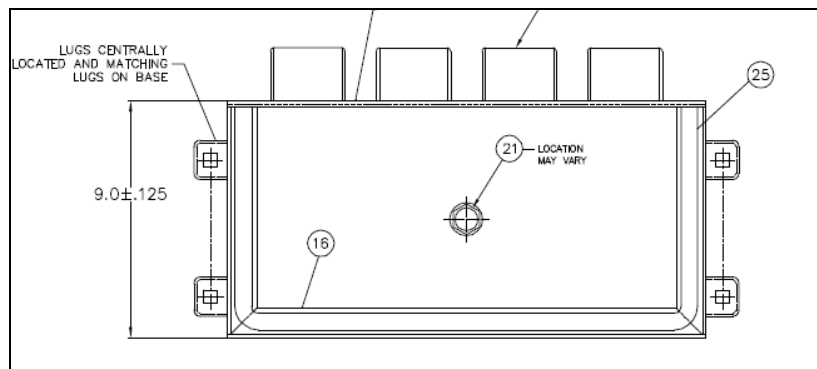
Inner end cove assembly detail from Patriot license drawing 10014E28
